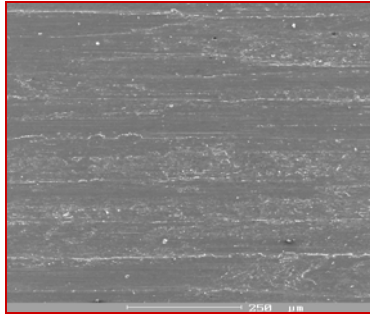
The machined surface morphology - the cutting tool HSCo, 8 % Co, TiN mag. 90x, $v_c=50$ m/min, $f=0,08$ mm, steel Cr20Ni8Ti
